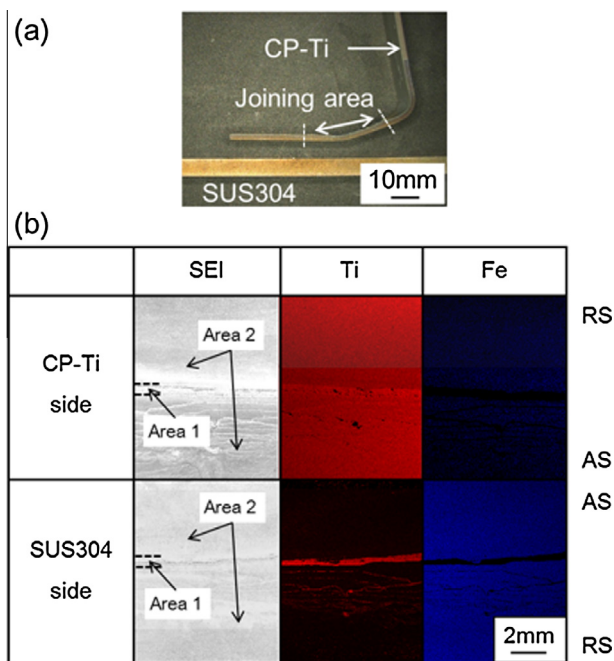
Appearance of the fractured joint after tensile shear test of the CP-Ti/SUS304 FSW lap joint.
